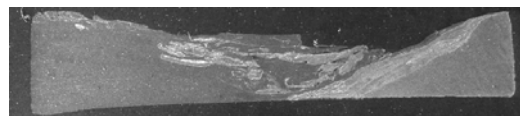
(b): Macrograph of weld produced at 600 rpm and 150 mm/min.
